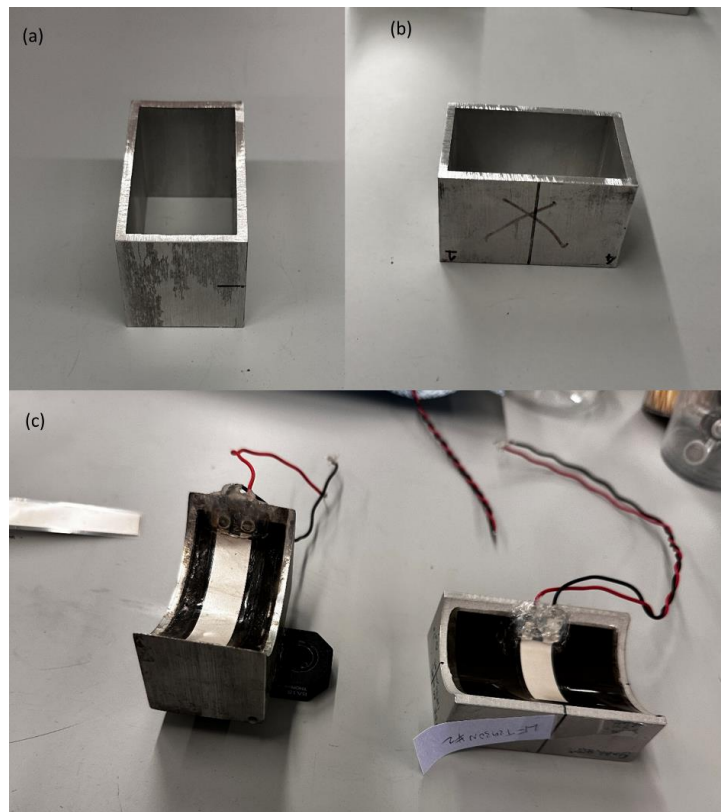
transducer case using a rectangular aluminum (a) side view, (b) Front View before machining and (c) Aluminum case after cut and backing material casted.
